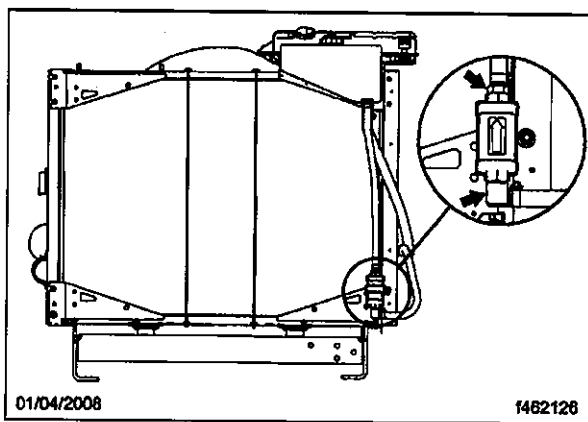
, Hydraulic Oil Filter Fittings that Must be Removed.
